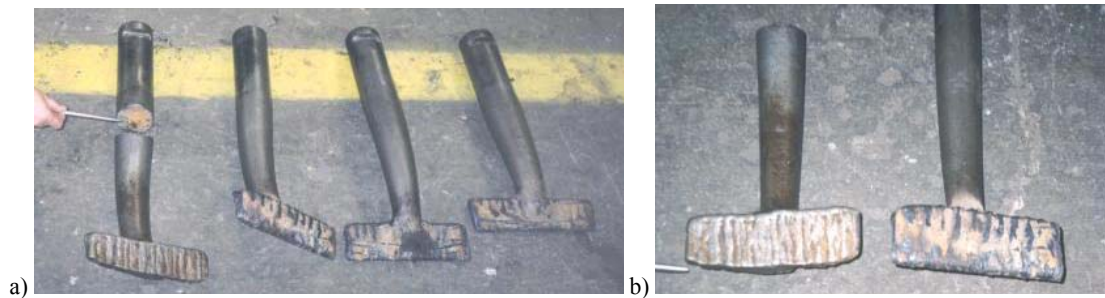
a) b) Failures of old model of tamping tool type BNRI 85
